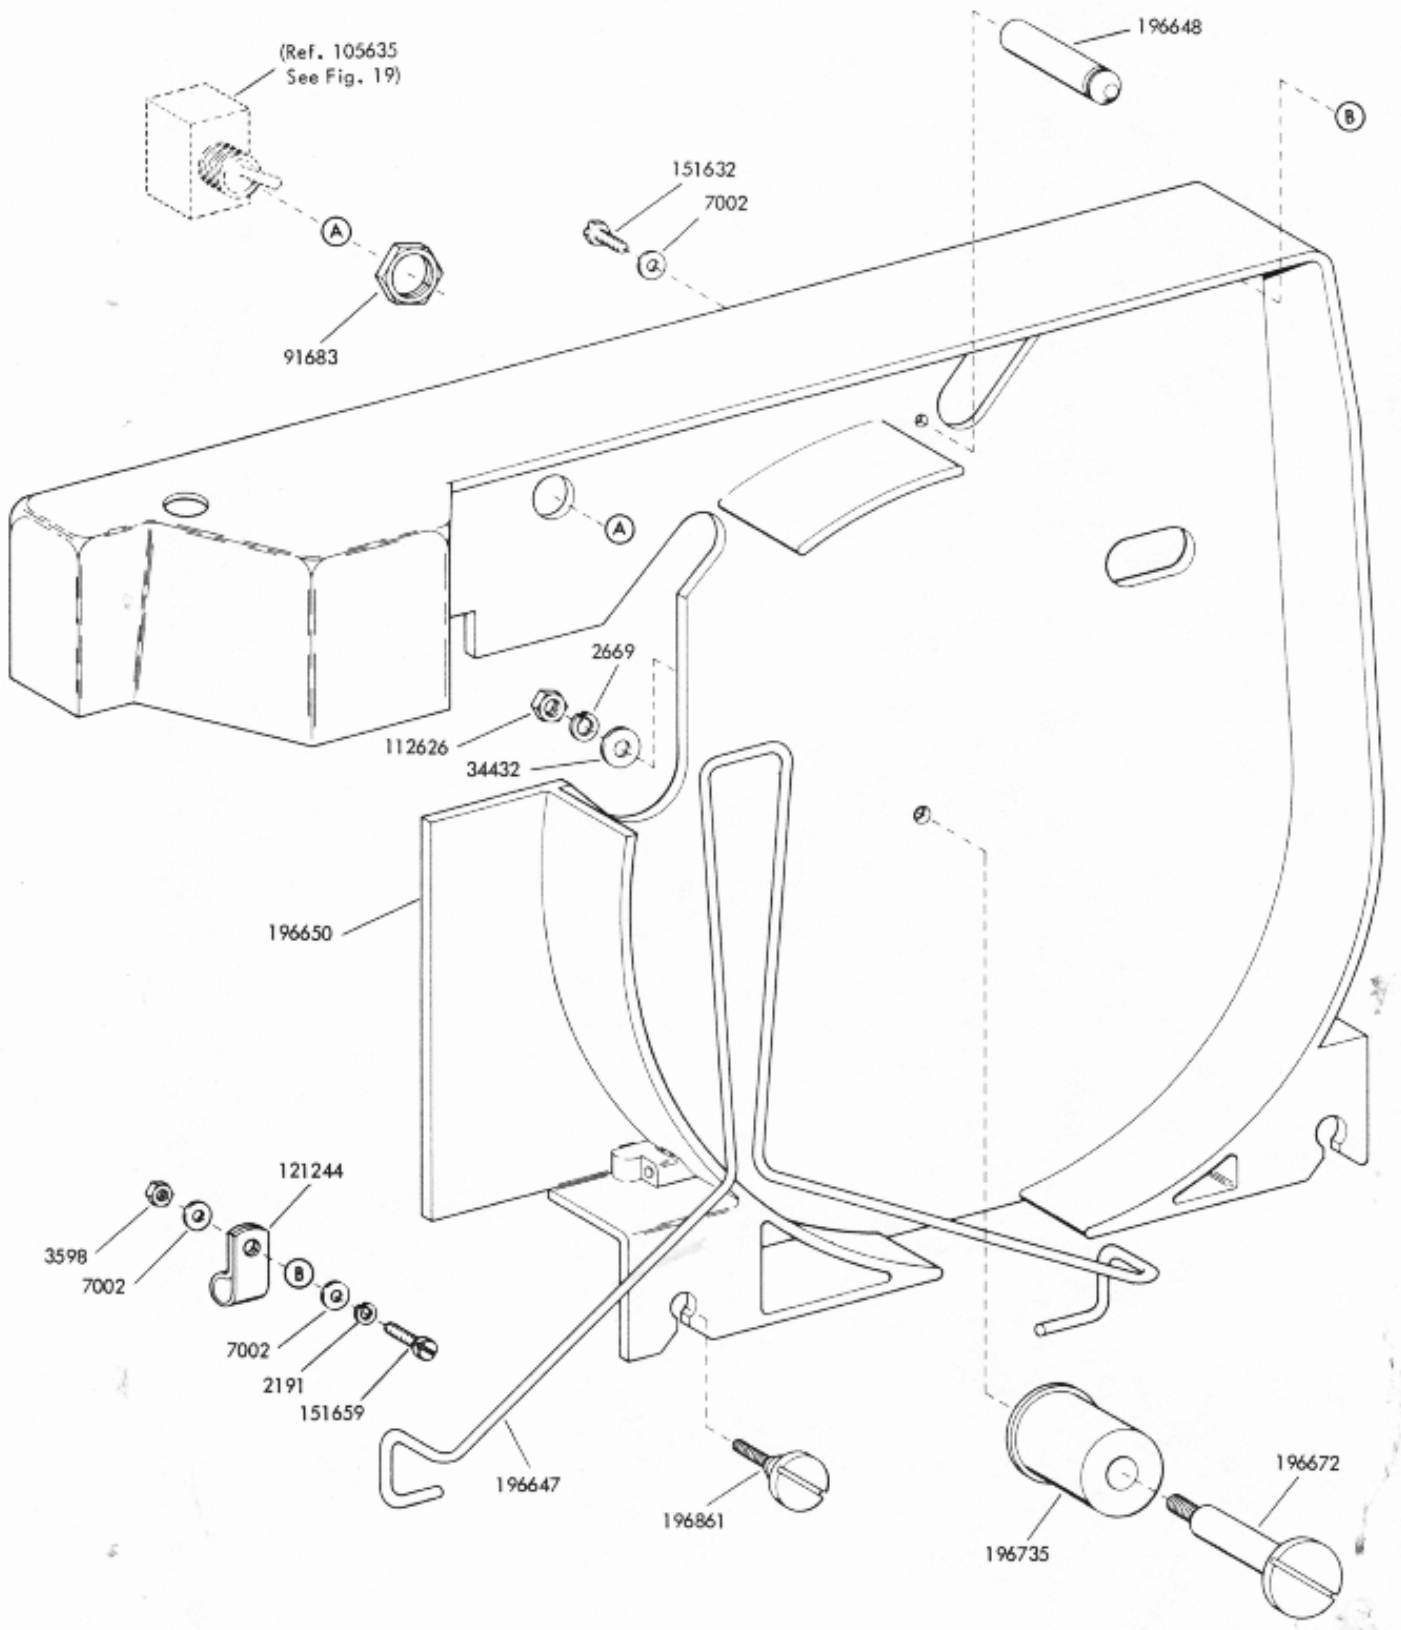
196818 COVER PLATE ASSEMBLY
